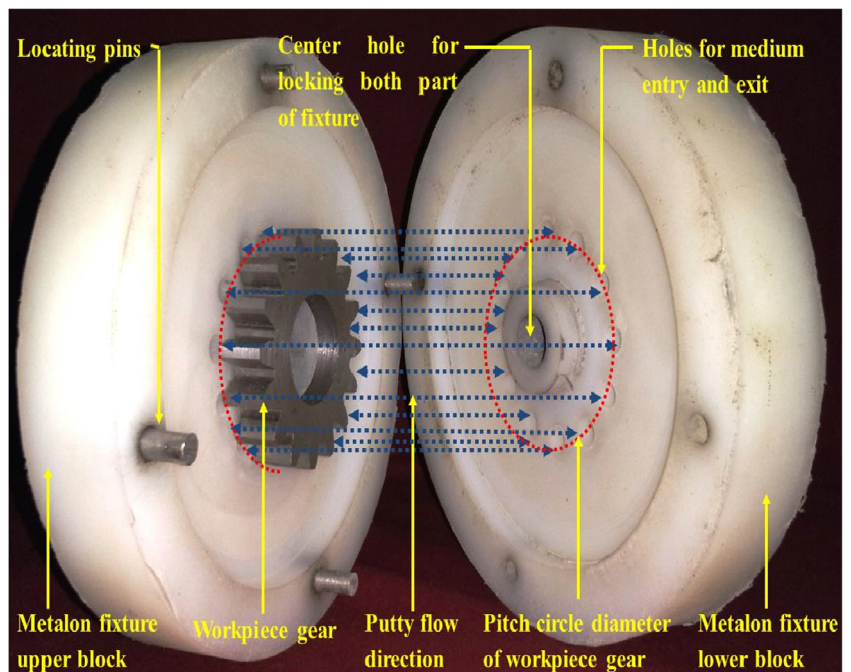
Photograph of the fixture designed to finish the spur gear by AFF [9]
